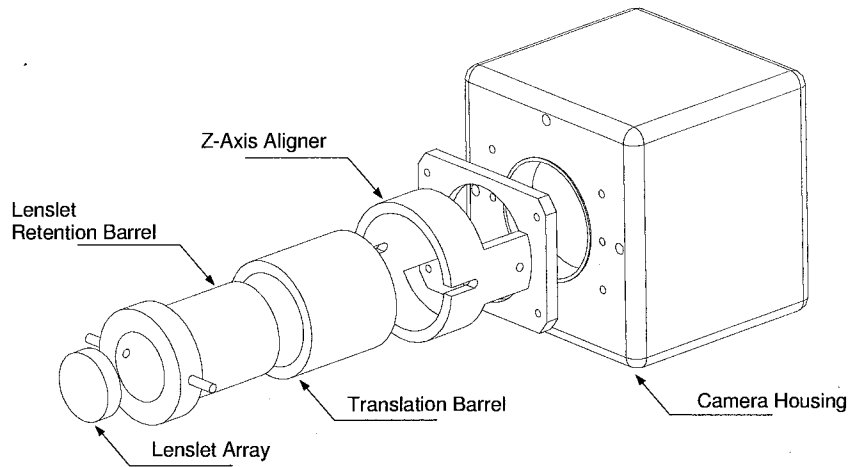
Exploded view of Shack-Hartmann wavefront sensor.
